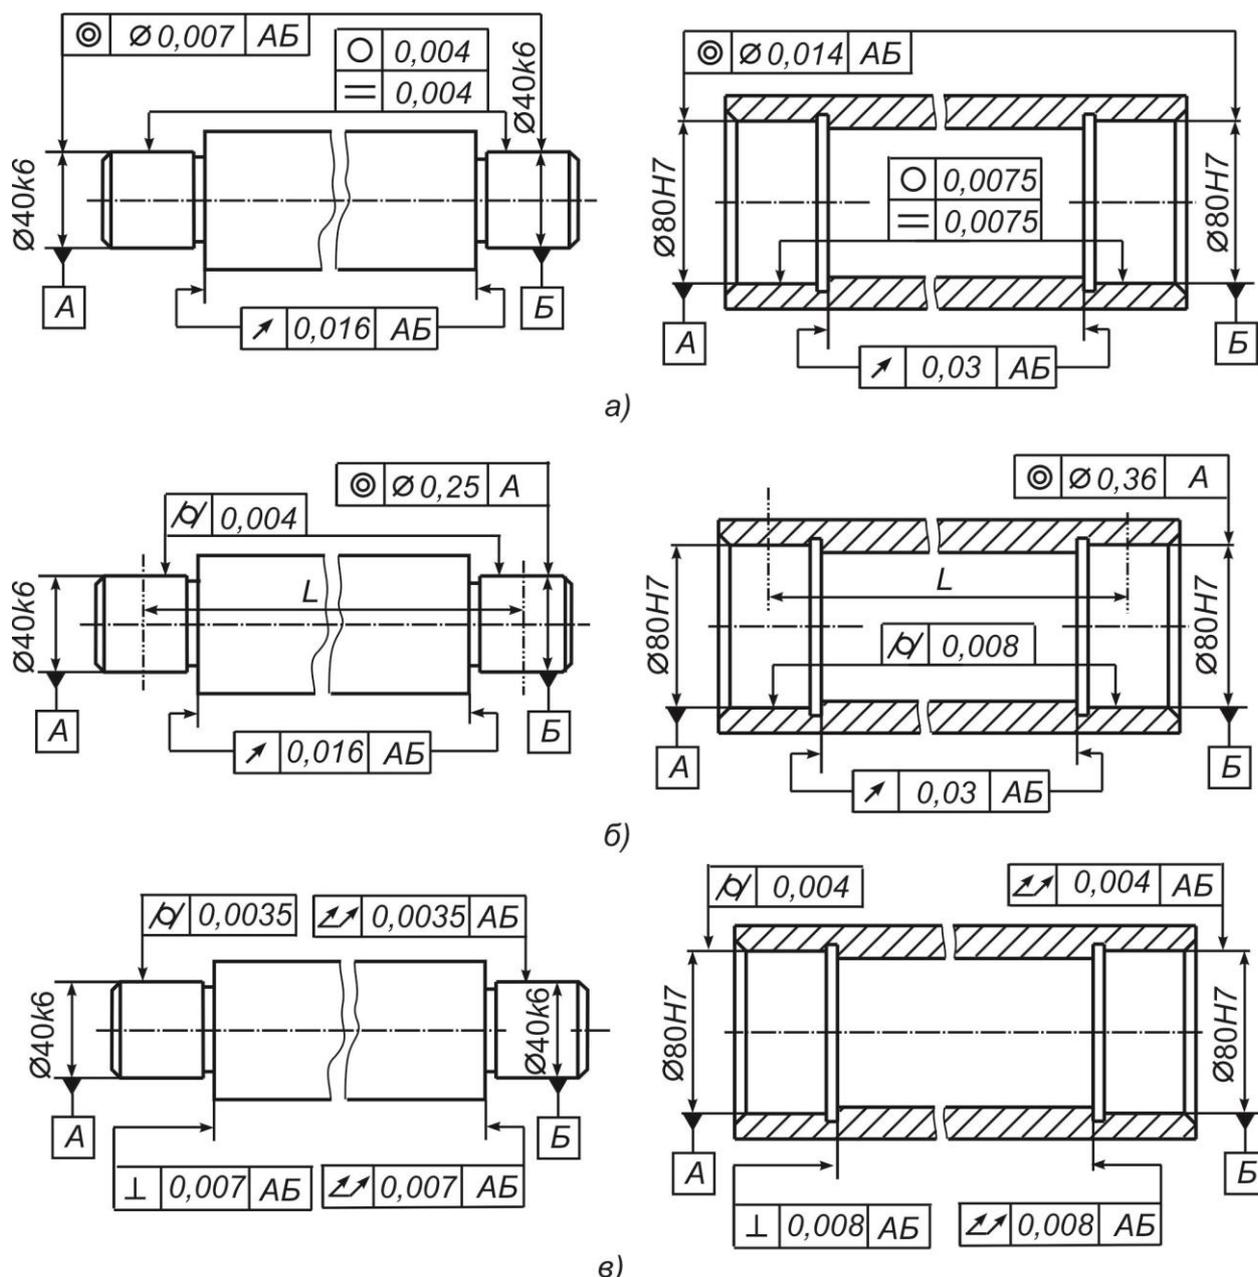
Form tolerances and alignment of mounting surfaces of shafts and frames:
